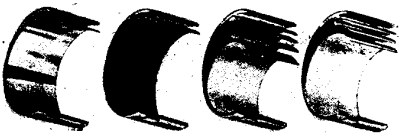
Layers of bearing material on different types of bearing shells.
